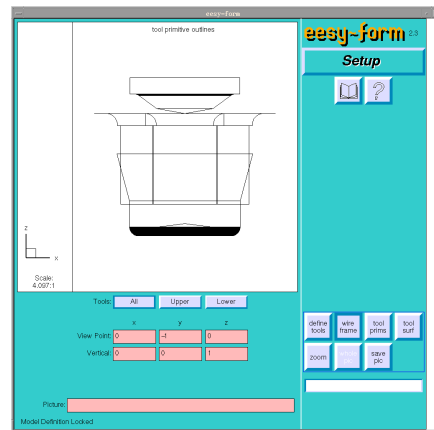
ref. Part: Tooling (wire frame – 3D view)
